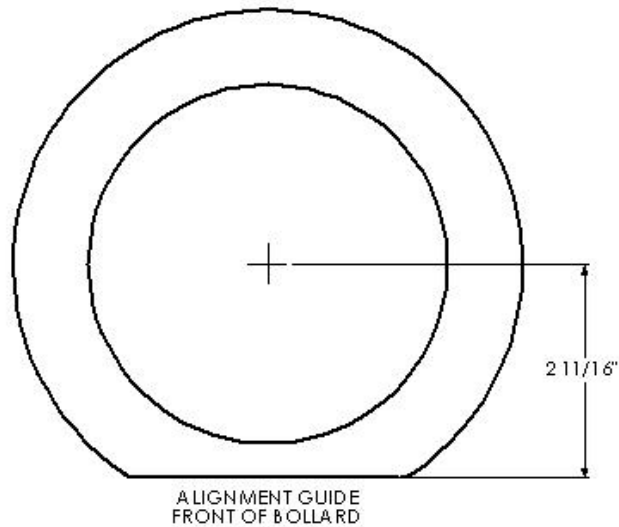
Top View of Bollard Post Assembly Showing Alignment Guide
